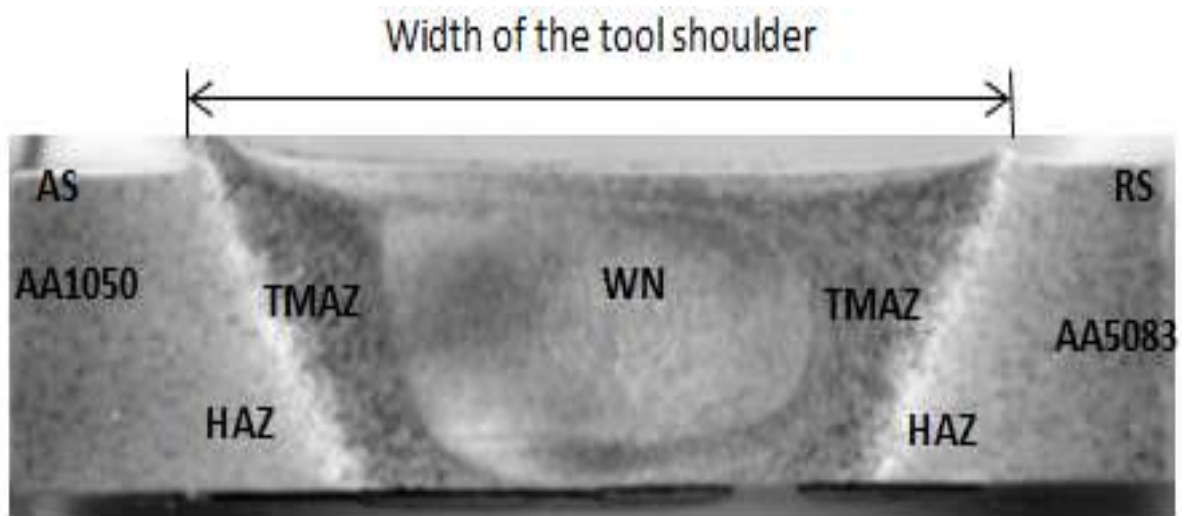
Macrostructure of the welded joint as WN- weld nugget, TMAZ: thermo-mechanical affected zone, HAZ: heat affected zone.
